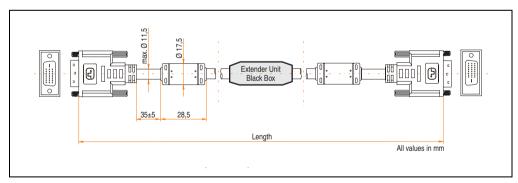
Dimensions - SDL cable with extender 5CASDL.0x00-10
